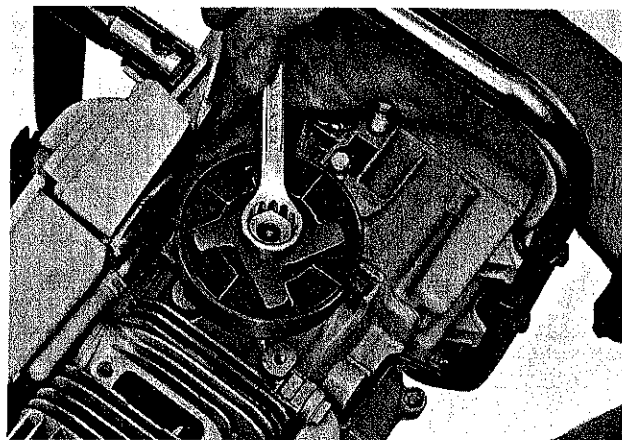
Removing the clutch rotor nut by turning in a clockwise direction. Note the locking pin for holding the flywheel
